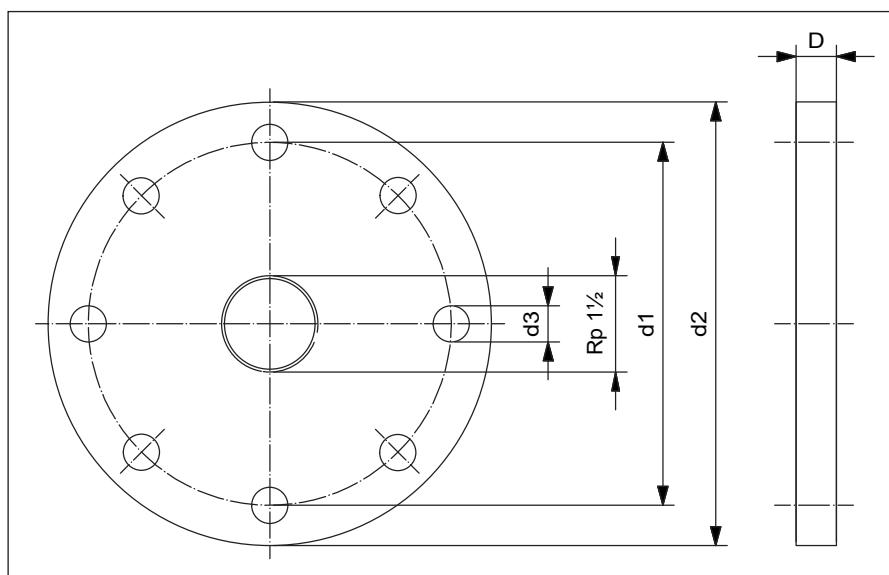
Dimensions of mounting flange (connection dimensions in accordance with EN 1092-1)
